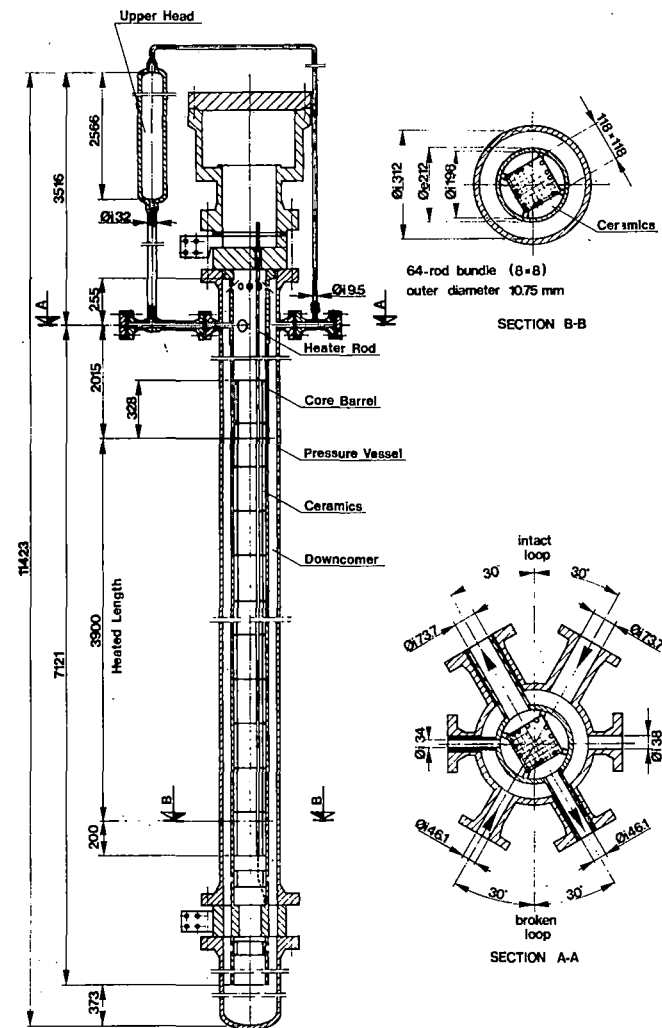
Schematic Drawing of the Reactor Pressure Vessel Model with Heated Section
